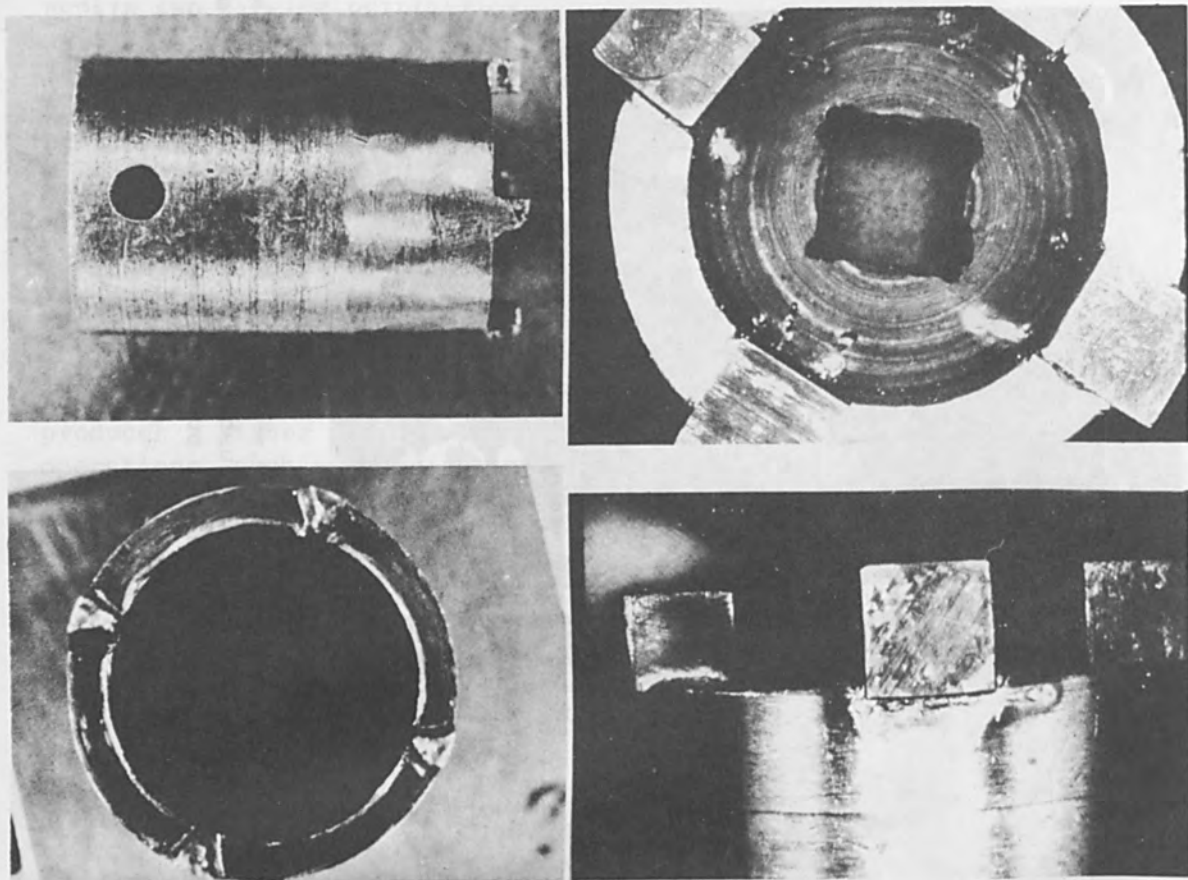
Air wrench (before and after) utilized on production equipment has new plugs installed by EB welding.
